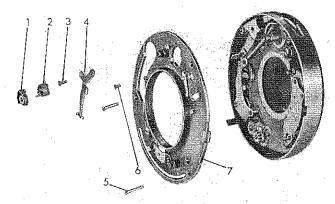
Cover Complete and Associated Parts, Exploded from Shutter Case
